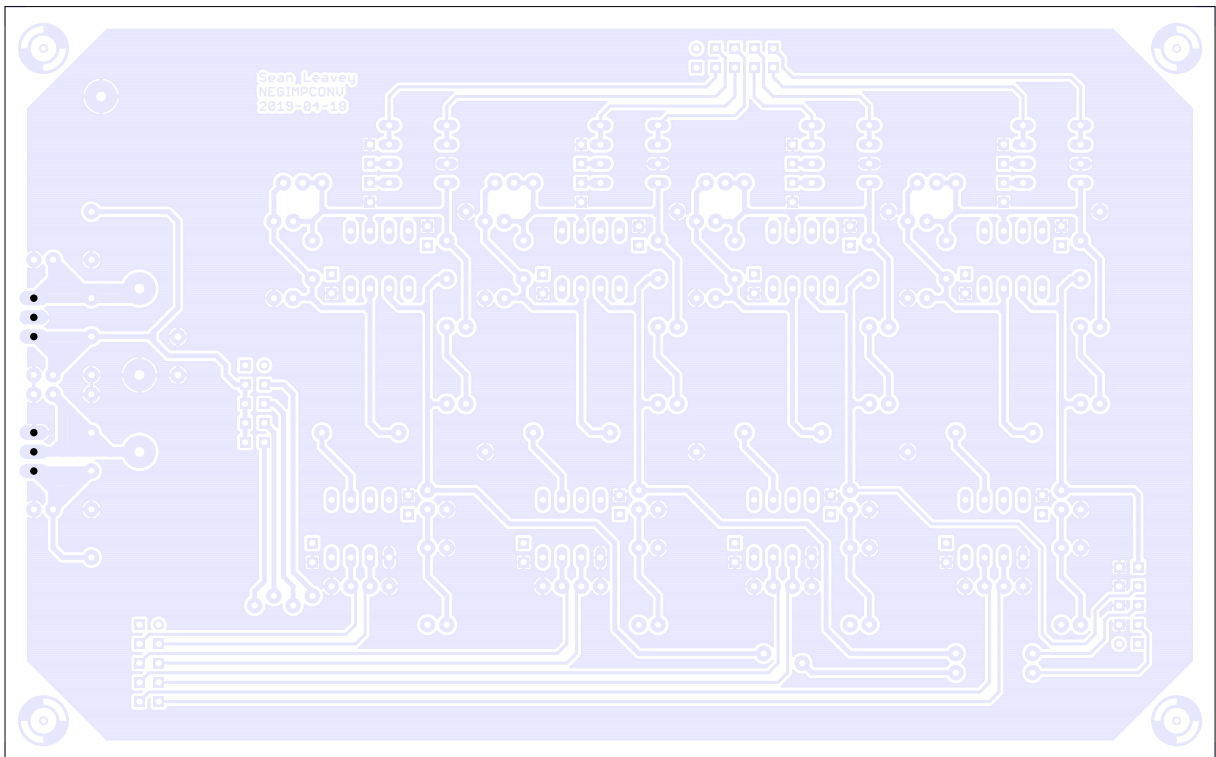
Board bottom view showing drills with 1.0 mm (0.039 in) diameter
